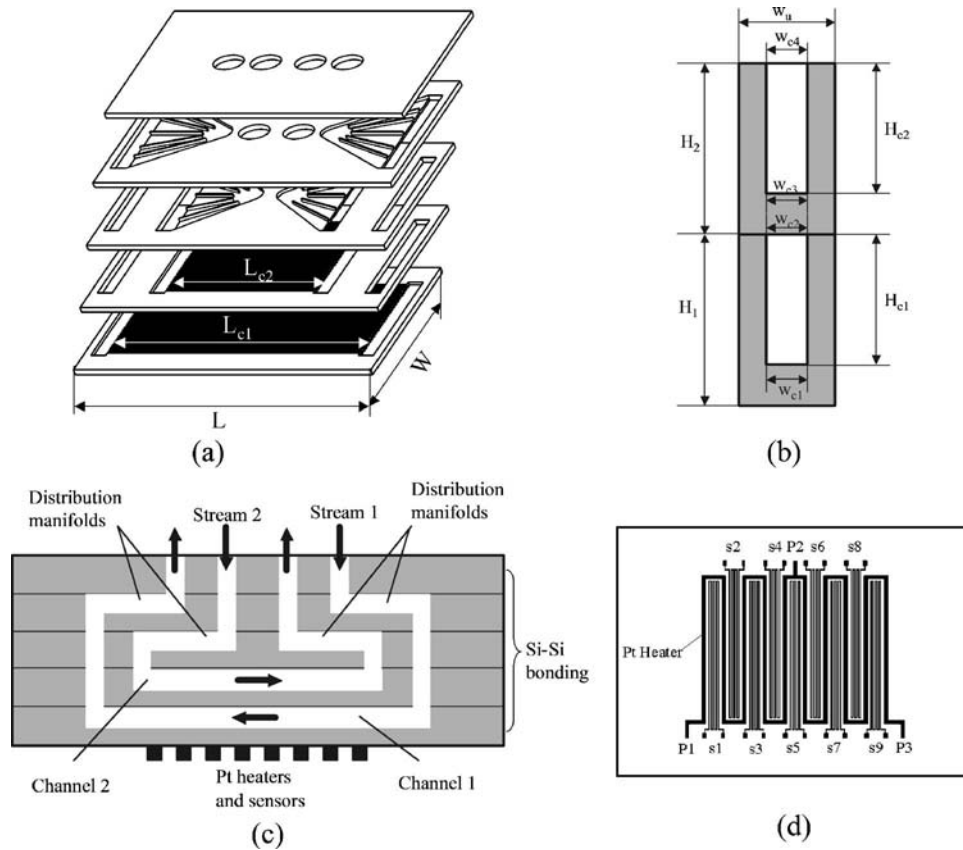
Schematic of the test module. Dimensions are not drawn to scale. (a) Exploded view of the stacked microchannel, (b) channel cross section and dimensions, (c) Side view of the stacked microchannel, and (d) bottom view of the thin-film heaters and temperature sensors.
